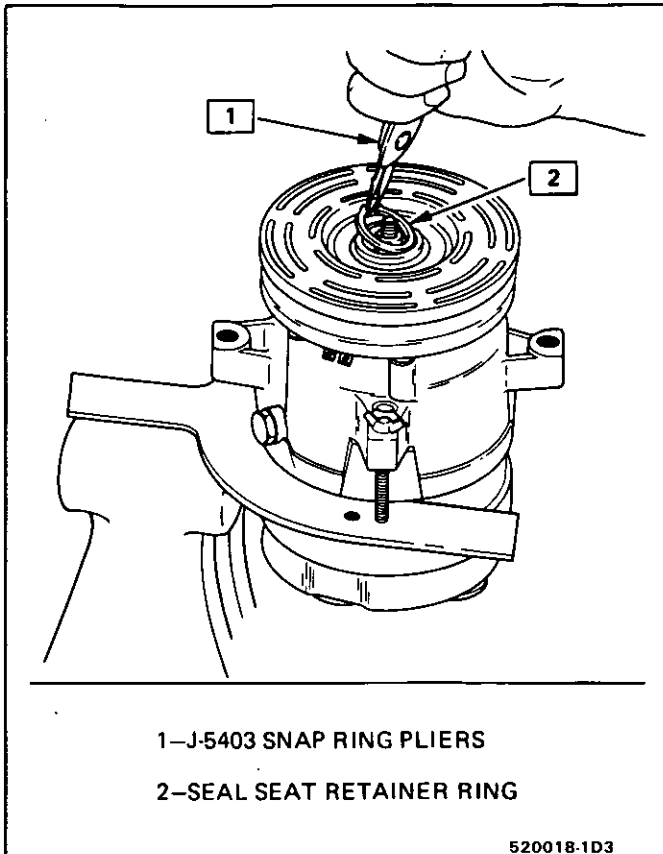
Removing or Installing Shaft Seal Seat Retaining Ring
